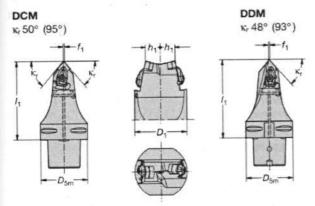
Displacement of the tool along Y-axis with more than one cutting edge
